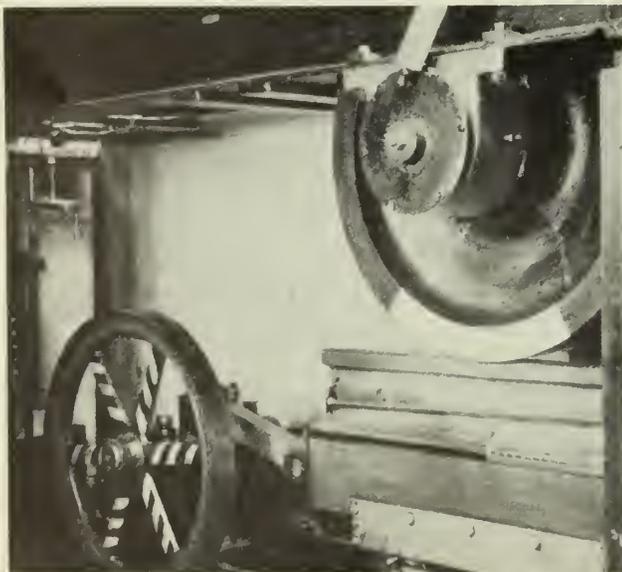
Rolling Wheel Load Machine for Fatigue Tests.
